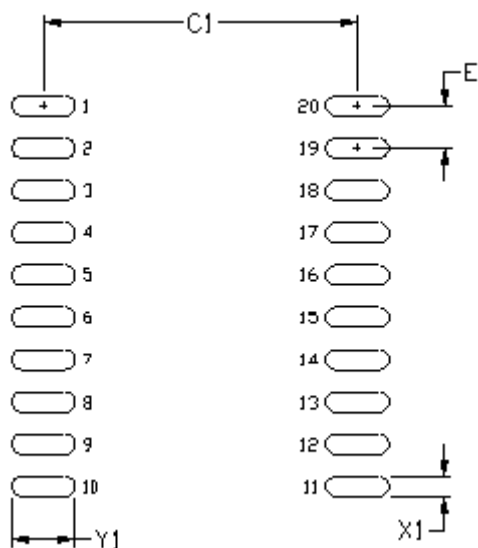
PCB Land Pattern: 20-Pin Wide Body SOIC
